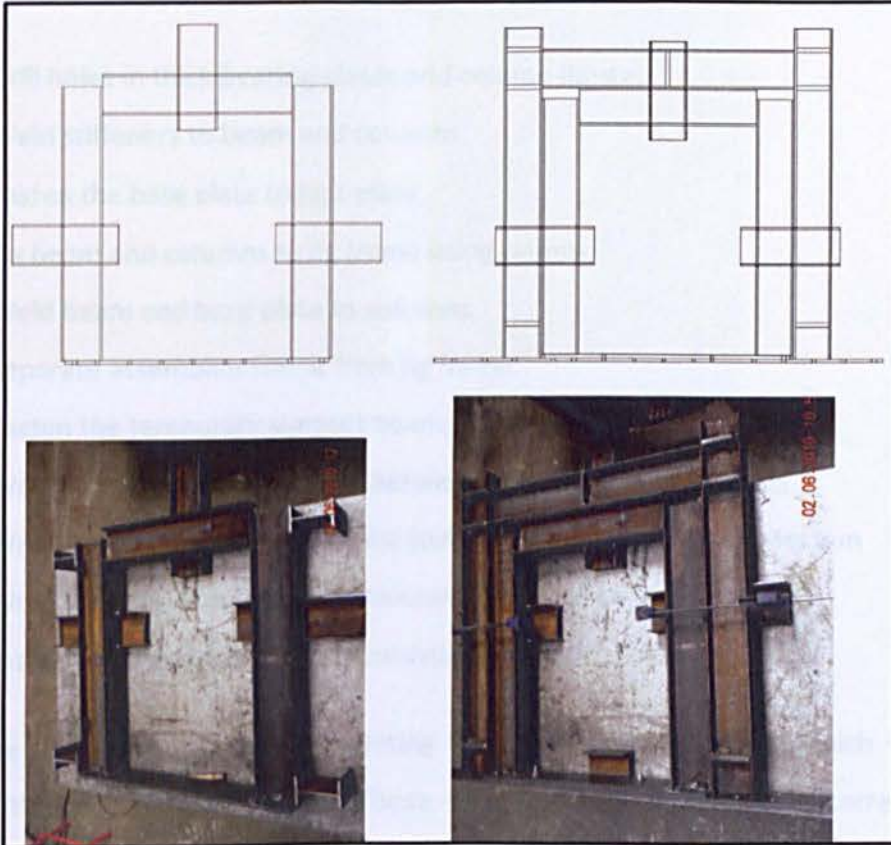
Jig frame was designed and constructed to improve the efficiency of specimen's construction
